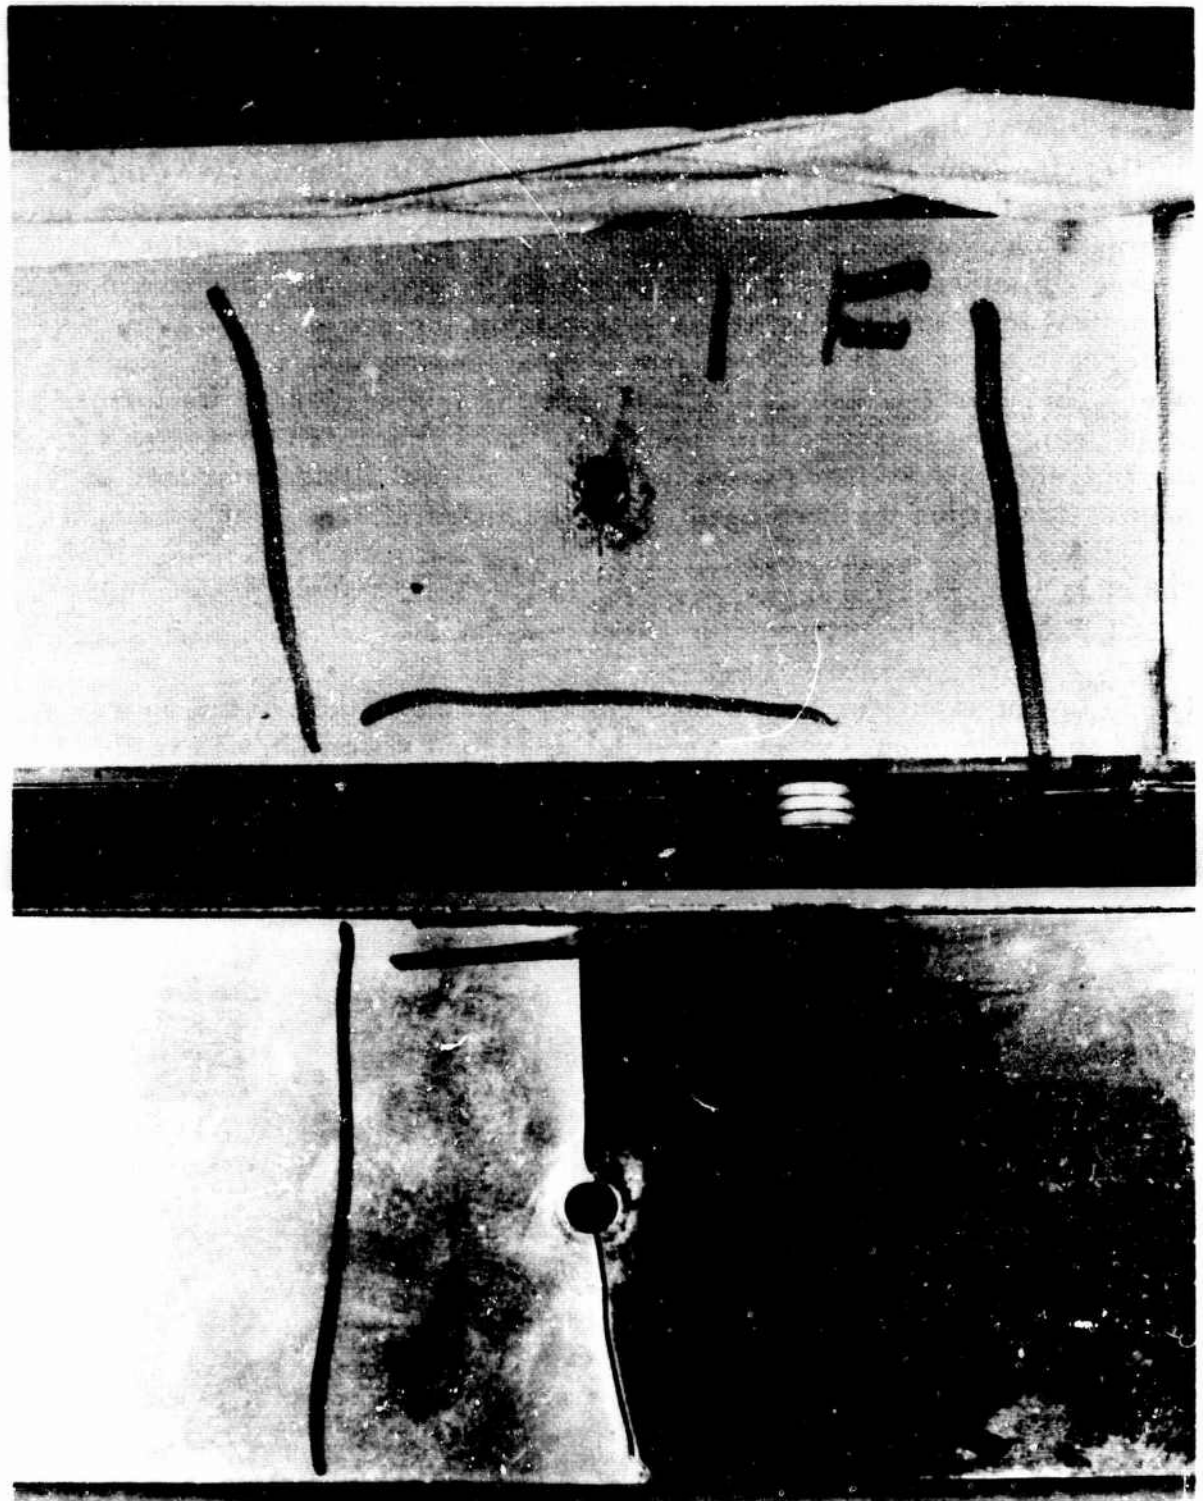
Cracked Laminations in Front Spar at Station 94.12, Specimen 2.
